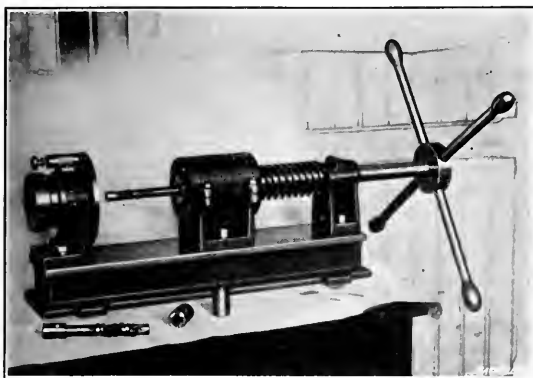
Fixture for tapping Brass Bushings of Coarse Pitch
